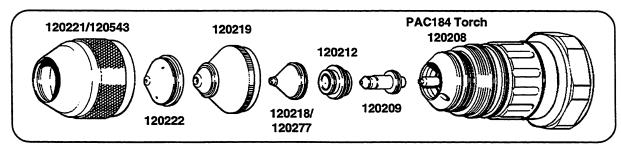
PAC184 Torch 15 and 30 Amp Mild Steel Consumable Parts
